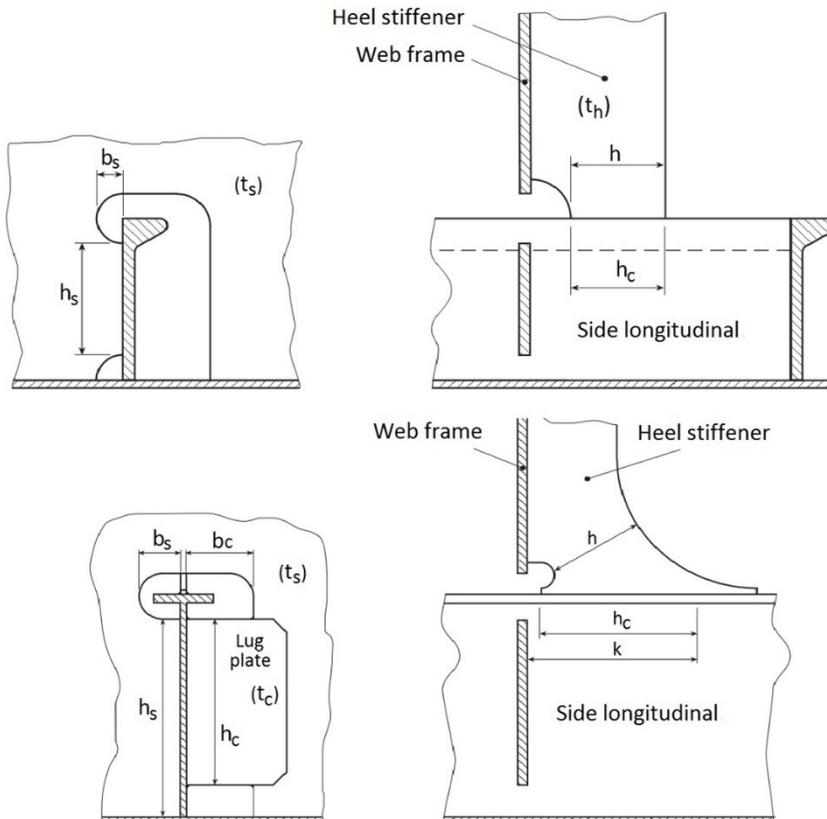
Typical intersections of longitudinals and transverse support members
